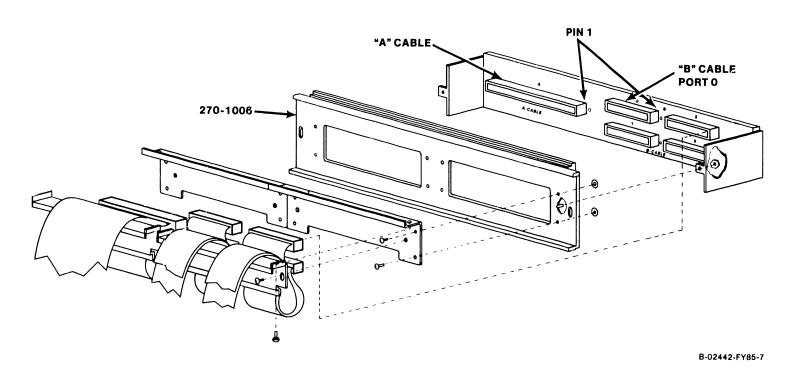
270-1006 "A" and "B" Cable Connector Assembly
